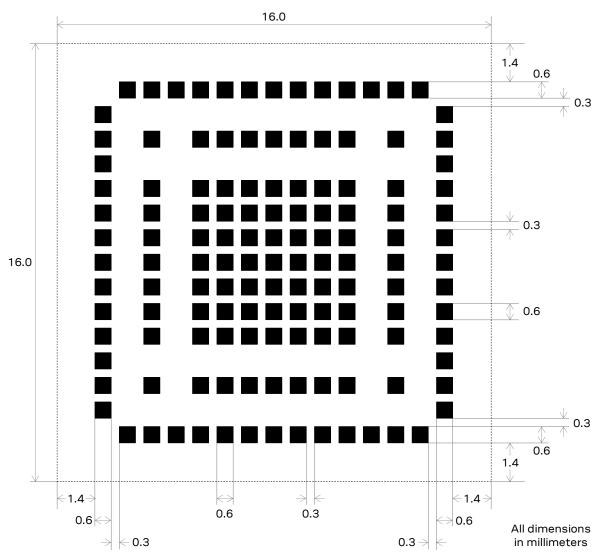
Suggested footprint and paste mask for LEXI-R422 modules (application board top view)
